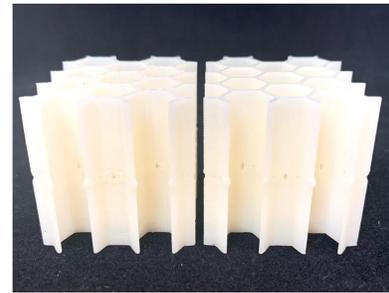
30mm tall honeycombs with .65mm diamond-shaped face buckling initiators
